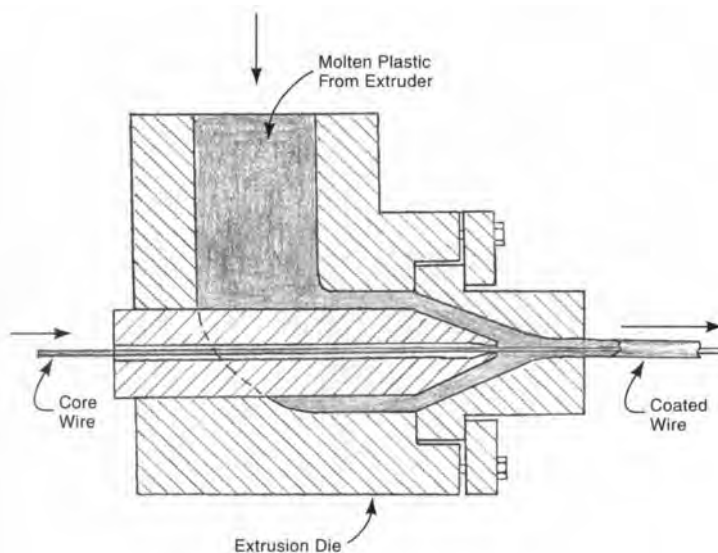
An operating extrusion die for coating wire, shown in cross-section.
